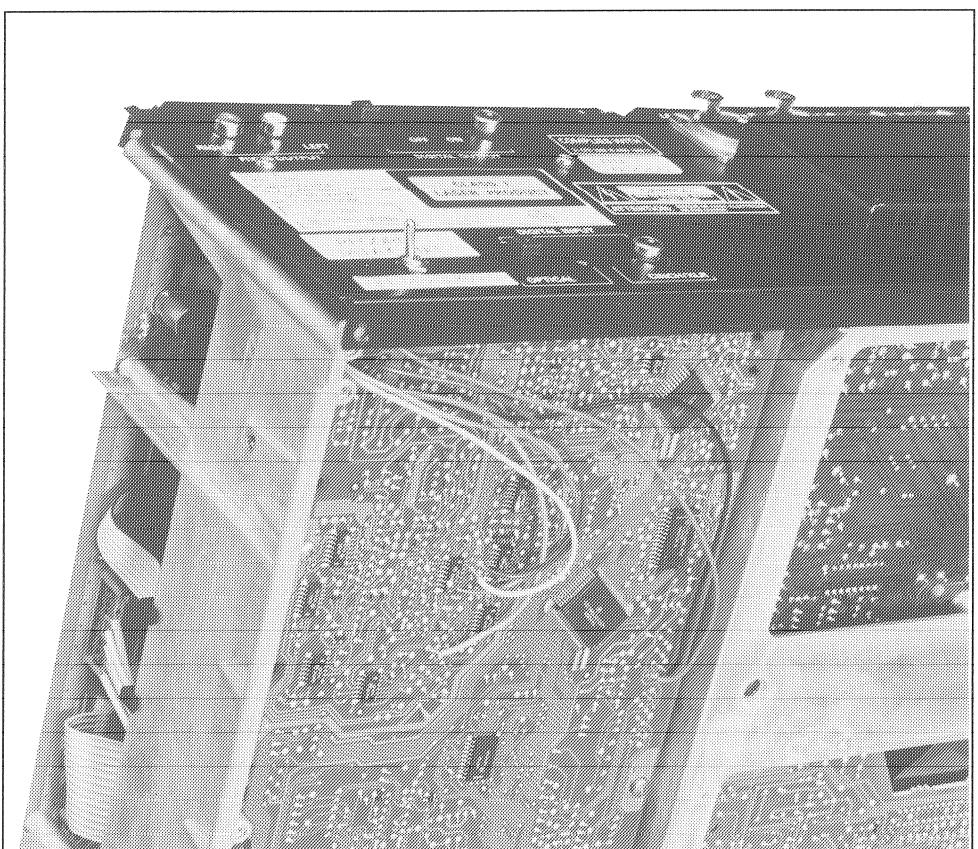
Connection of the special connection cable on the encoder board. Rear bottom view
